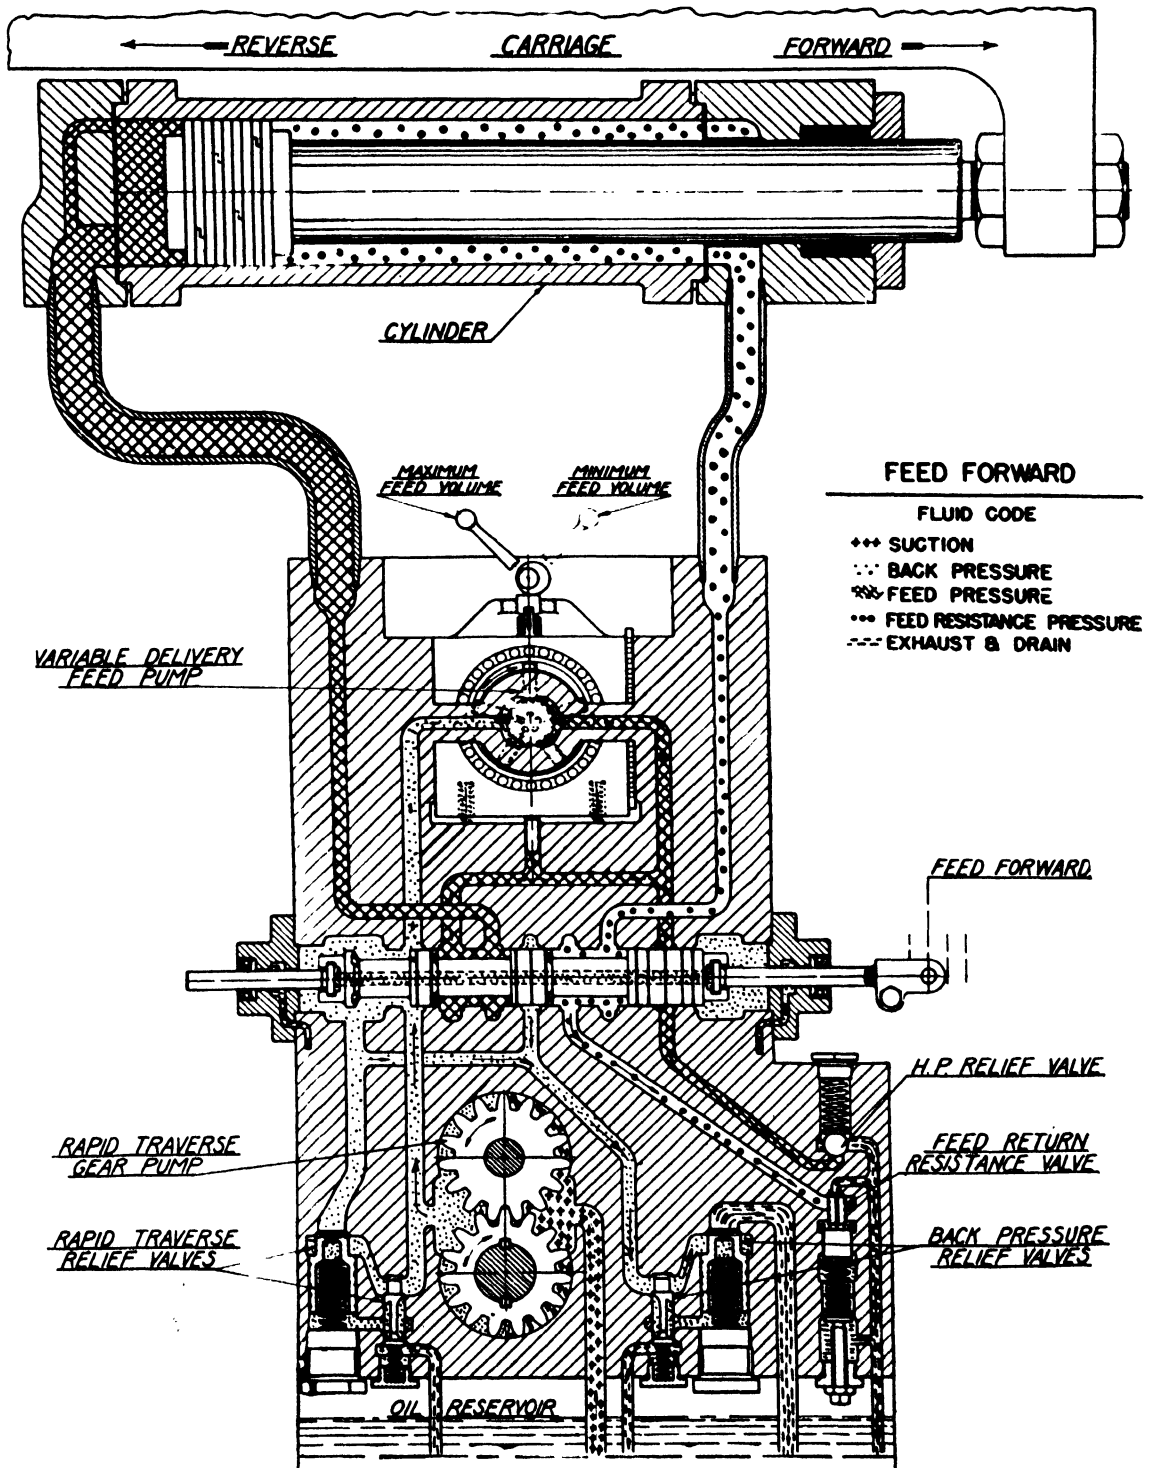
Oilgear fluid power feed, feed. (The Oilgear Co., Milwaukee, Wis.)
